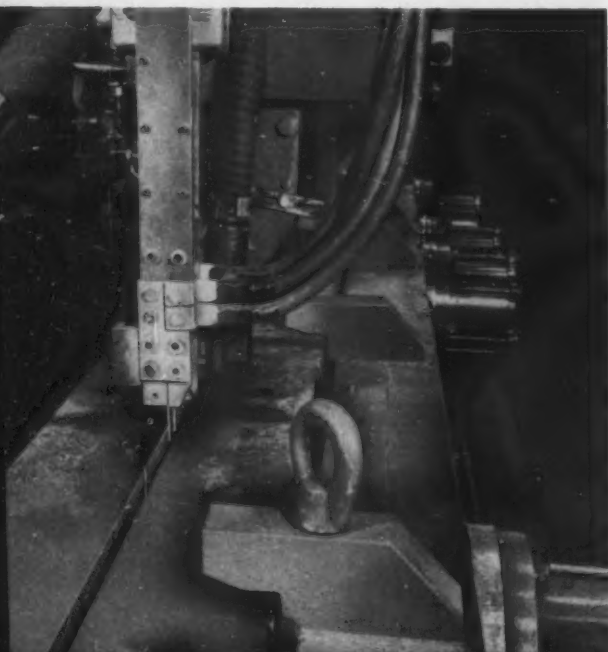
(Right) Two automatic heads arranged in tandem make external welds on box girder. Mounting of fixture on rollers simplifies turning the girder for second weld.
